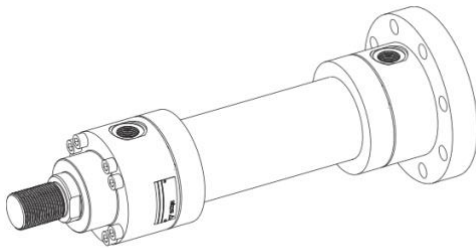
The axonometric assembly model of the MF4 Hydraulic Cylinder
